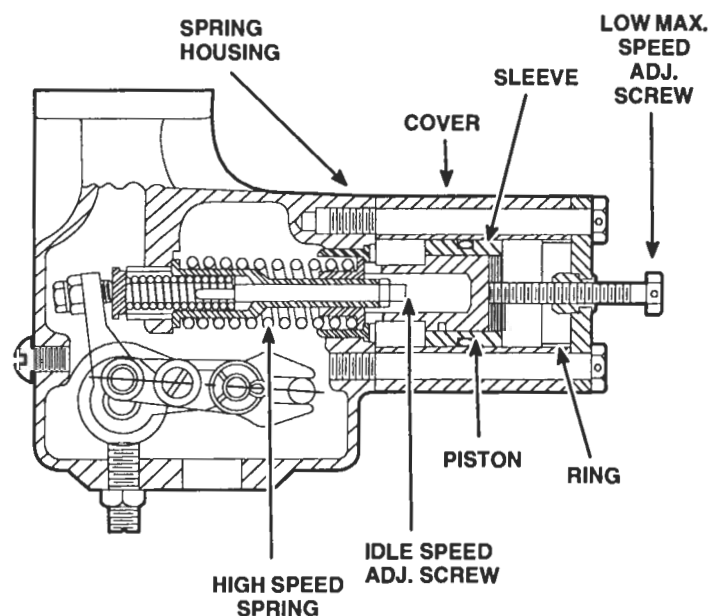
Spring and Piston Assembly of Former Dual Range Governor
